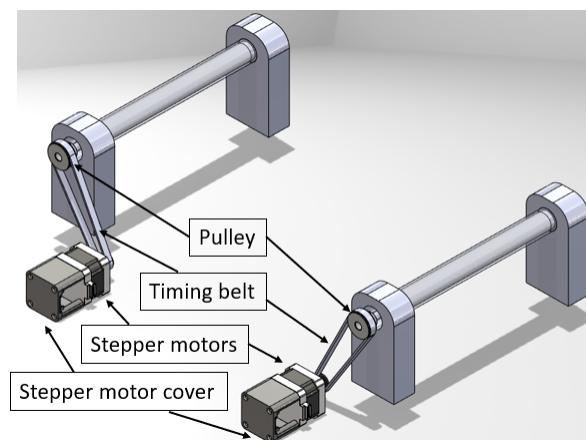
Design of the material feed and wastage take-up roller with necessary components, i.e., pulley, timing belts, and stepper motor covers.
